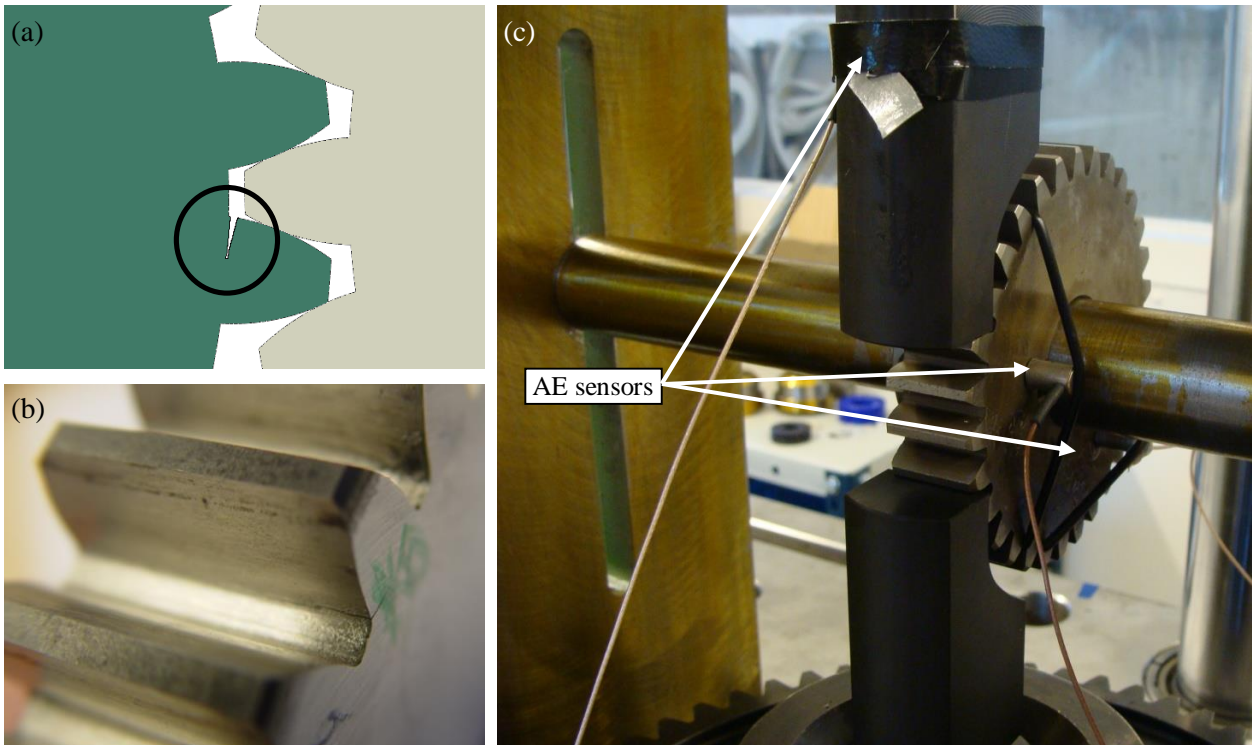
(a) Simulated fatigue crack in the tooth of gear, (b) Fatigue crack in the tooth due to a test and (c) Set-up configuration of the fatigue tests with gear teeth monitored by means of AE.
